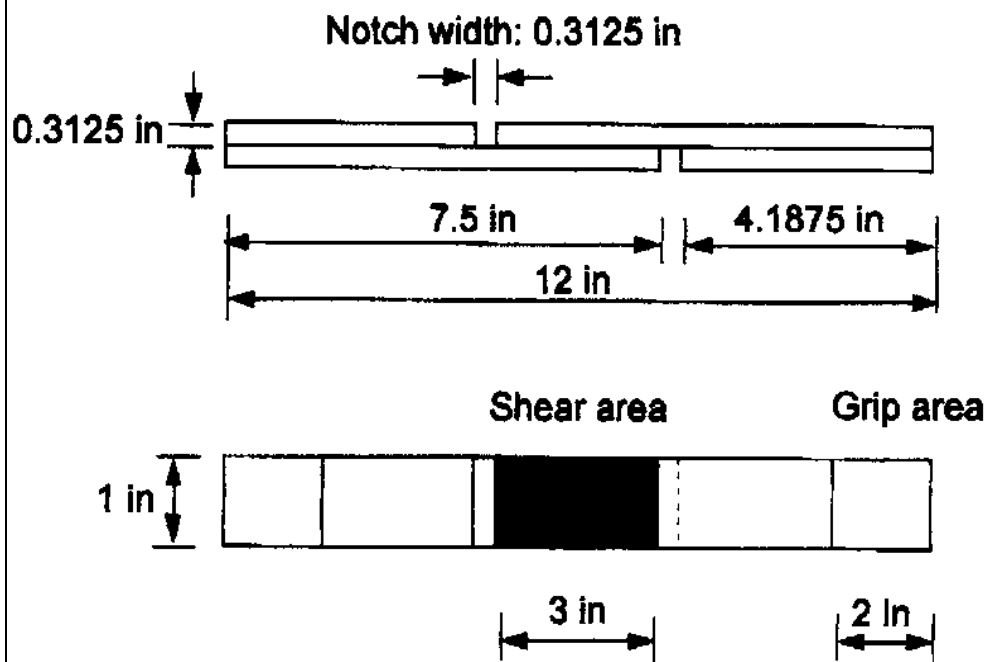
Setup and dimensions of single lap joint coupons for H-deck system.
